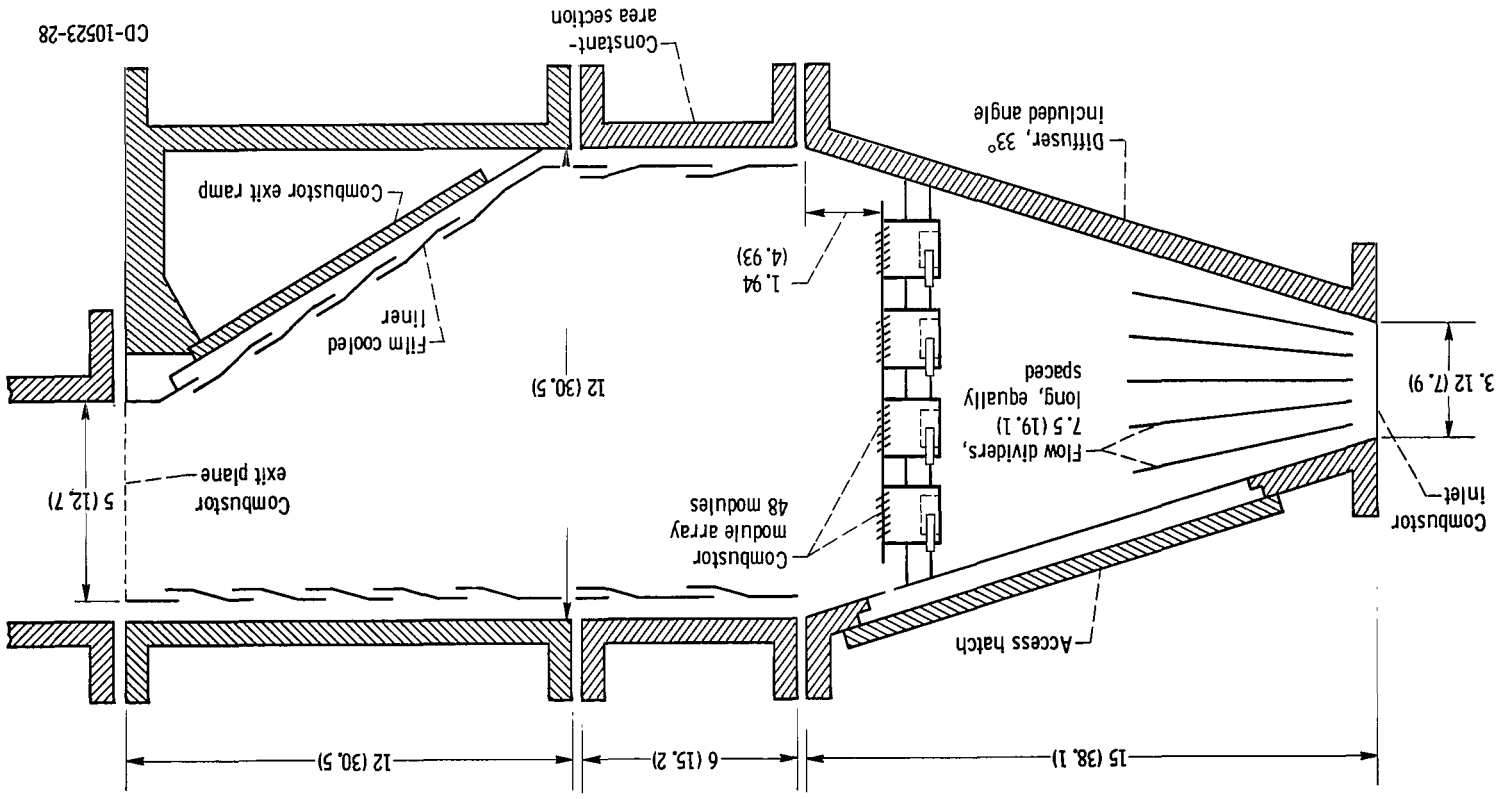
Combustor installation in test section. (Dimensions are in inches (cm).)
